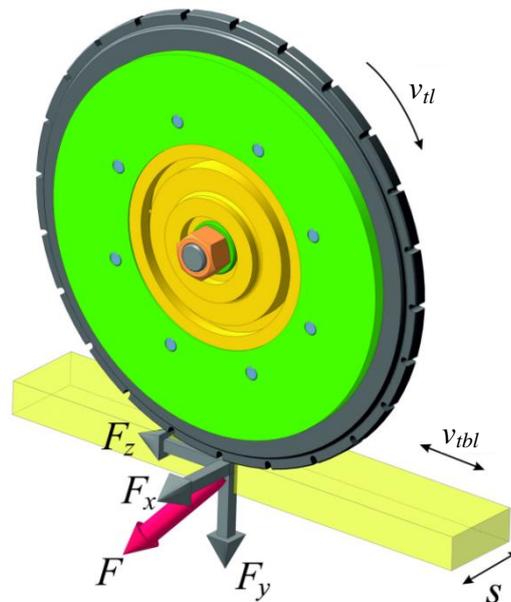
The components of the friction force in the contact zone during friction hardening of flat surfaces: v_{tl} – circular speed of the tool; S – cross-feed; v_{tbl} – speed of the machine table translation
